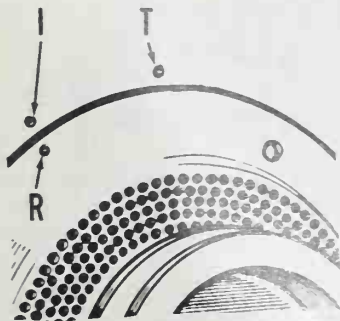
View of timing marks located on air shroud. Refer to text for injection timing.
